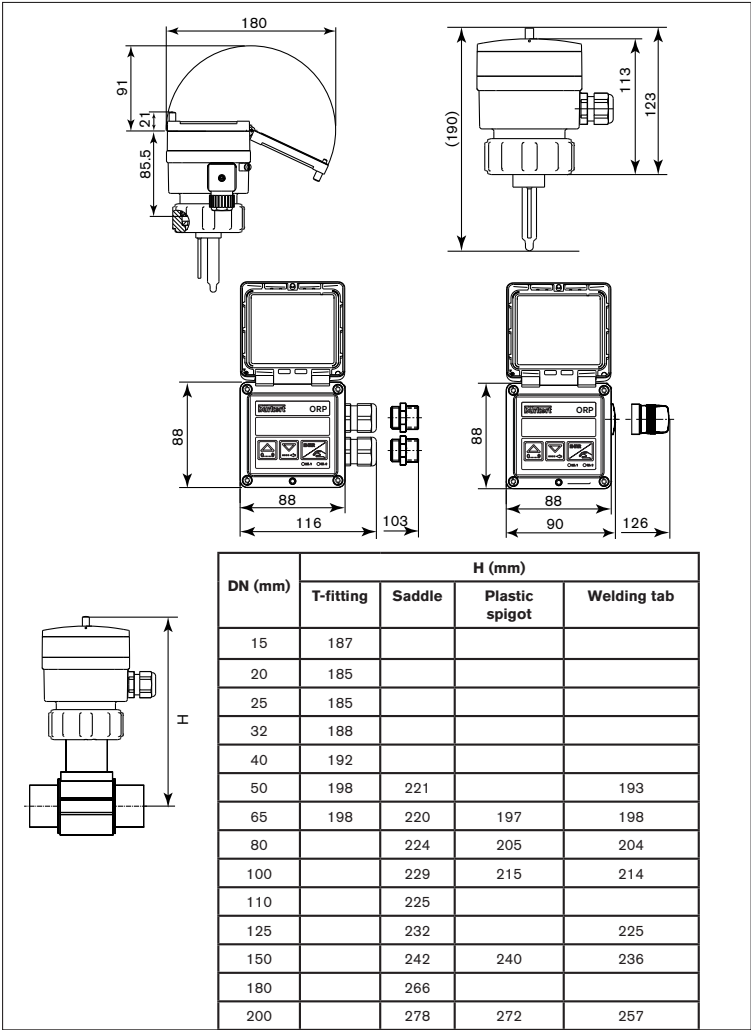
Dimensions redox transmitter 8206 compact version
